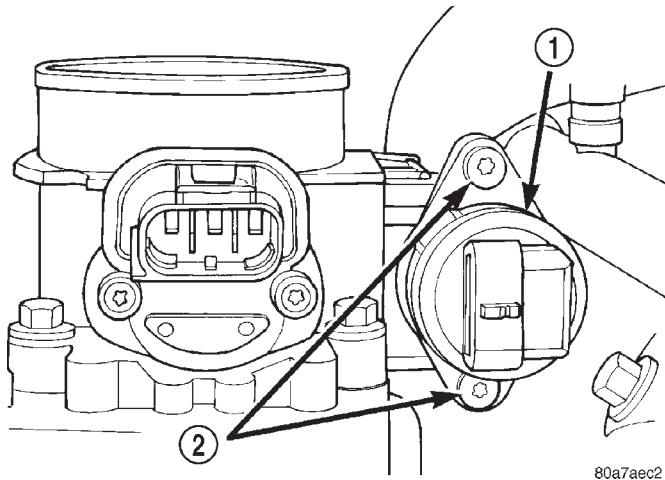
Mounting Bolts (Screws)—IAC Motor
